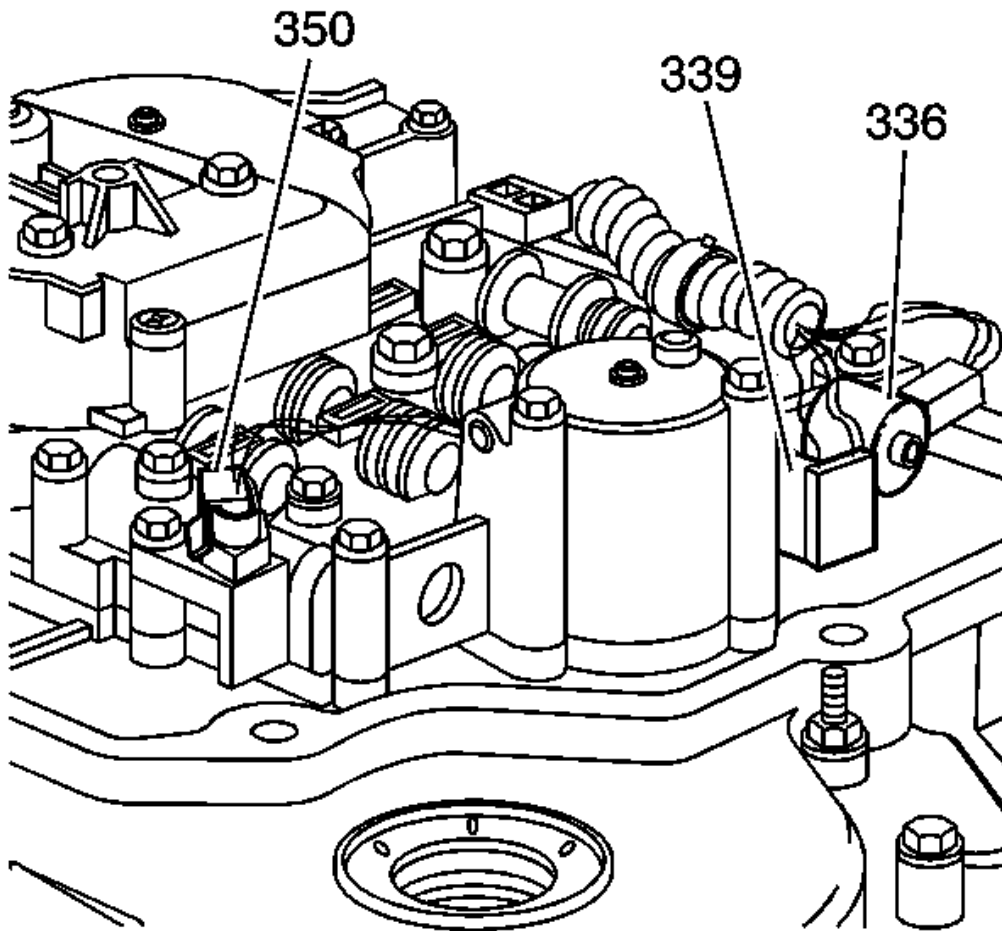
View Of Pressure Control Solenoid Valve, Torque Converter Clutch Solenoid Valve & Transmission Temperature Sensor Electrical Connectors
